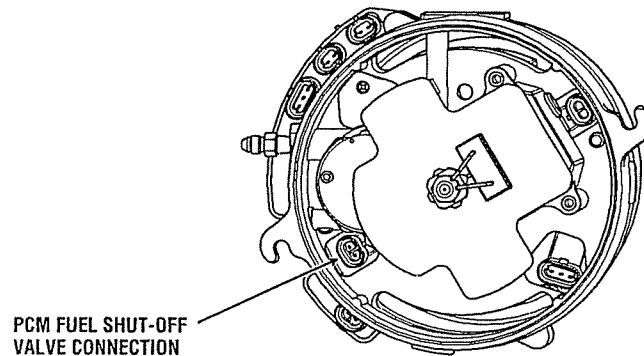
PCM Fuel Shut-Off Valve Connection
